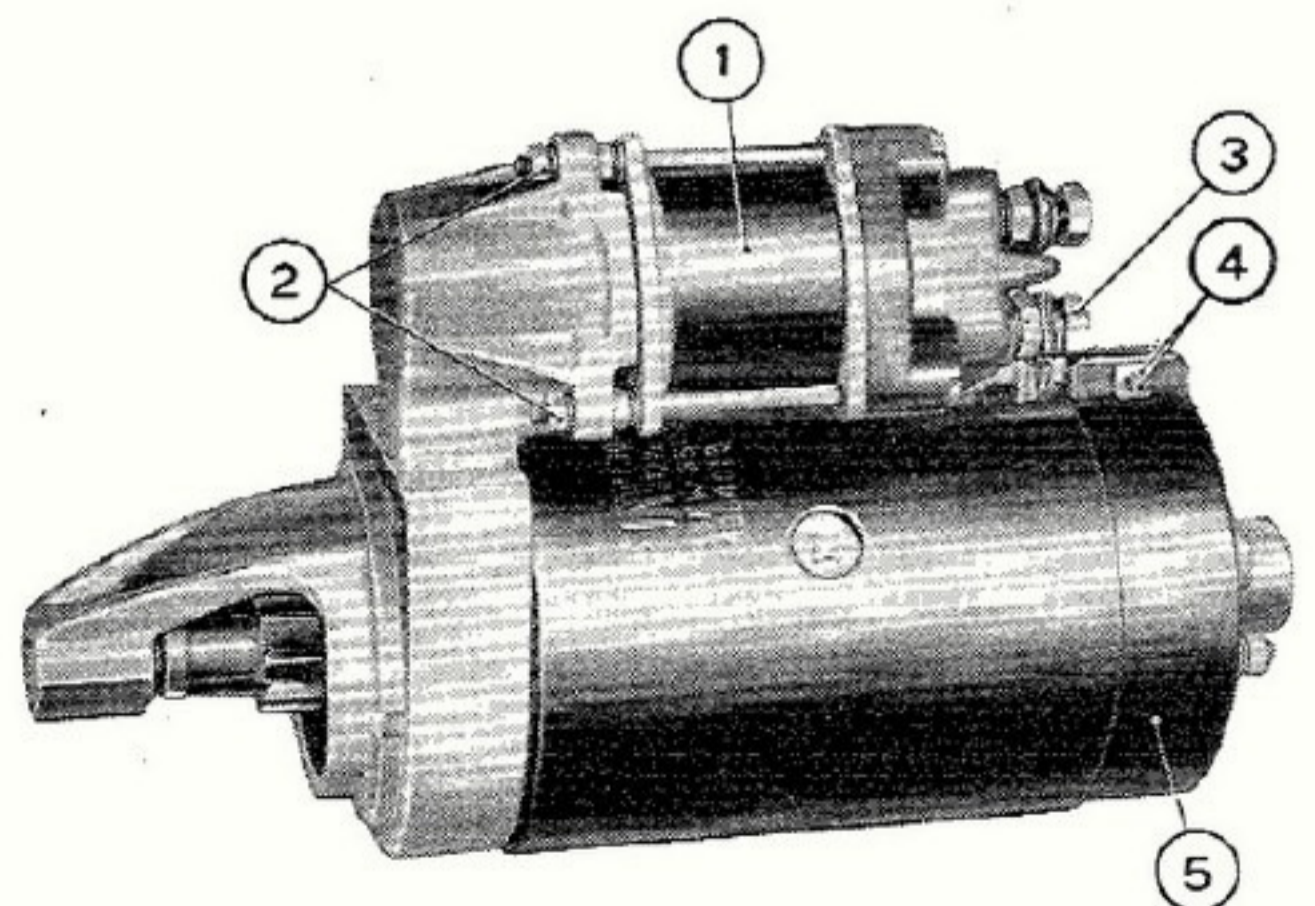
Starter assembly complete with electromagnet. 1. Electromagnet - 2. Electromagnet mounting nuts - 3. Starter field winding terminal fixing nut - 4. Cover band screw and nut - 5. Cover band.
